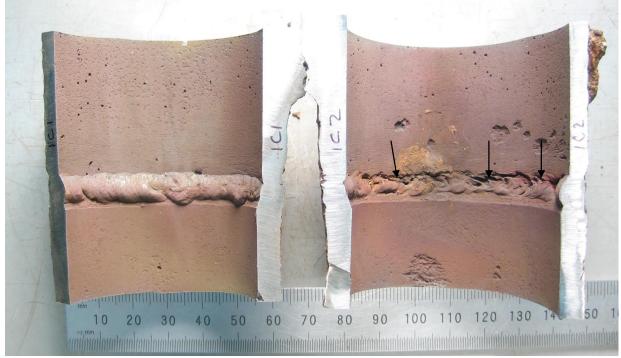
View of Internal Surfaces of Tube #114 Showing Leaks (Arrows) Coinciding with Circumferential Weld. Internal Pitting of Tube Segment Above Circ. Weld Was Noted.
